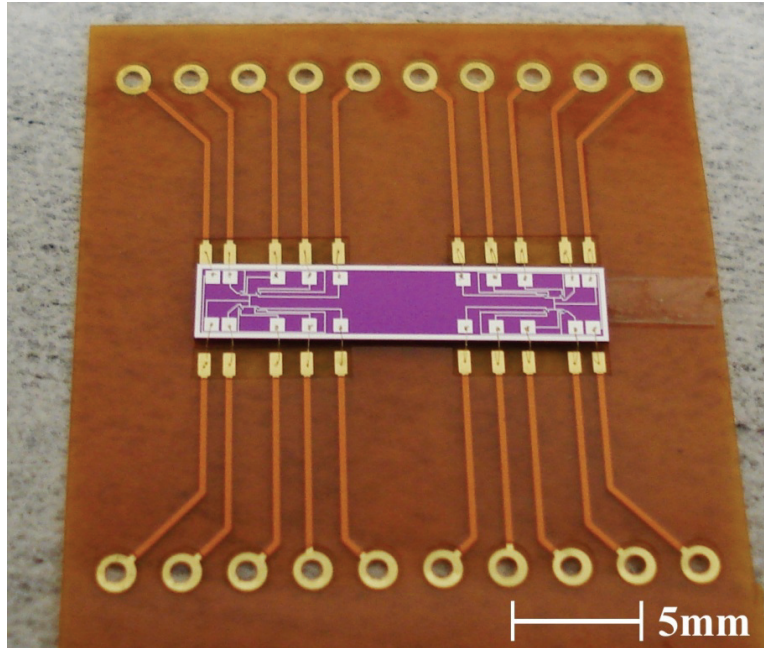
Gold wire bonds created between gold-plated copper pads on an FPCB and aluminum pads on a scoliosis sensor strip.
